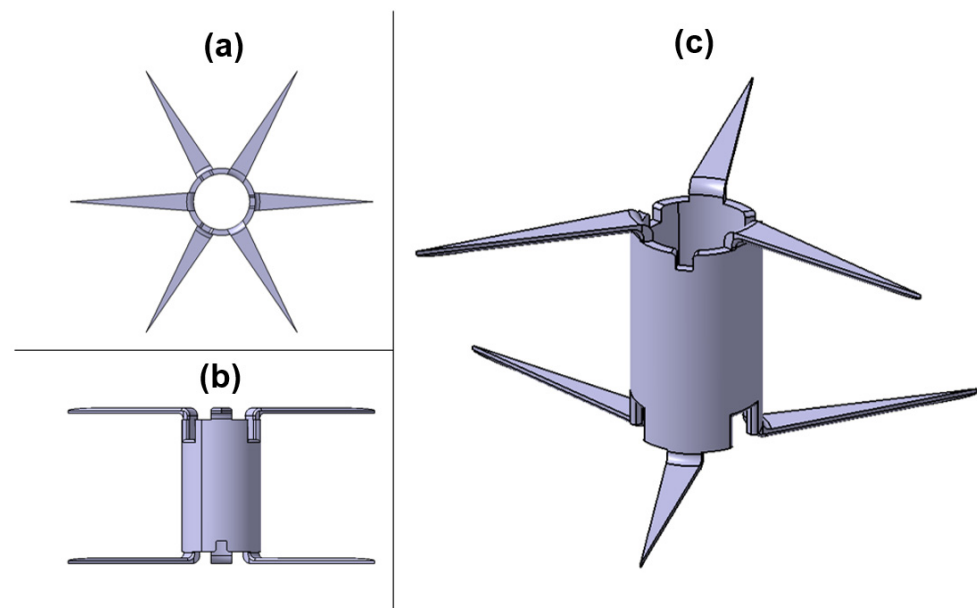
Final design of the positioning system in different views: (a) top view, (b) side view, (c) three-dimensional view.
